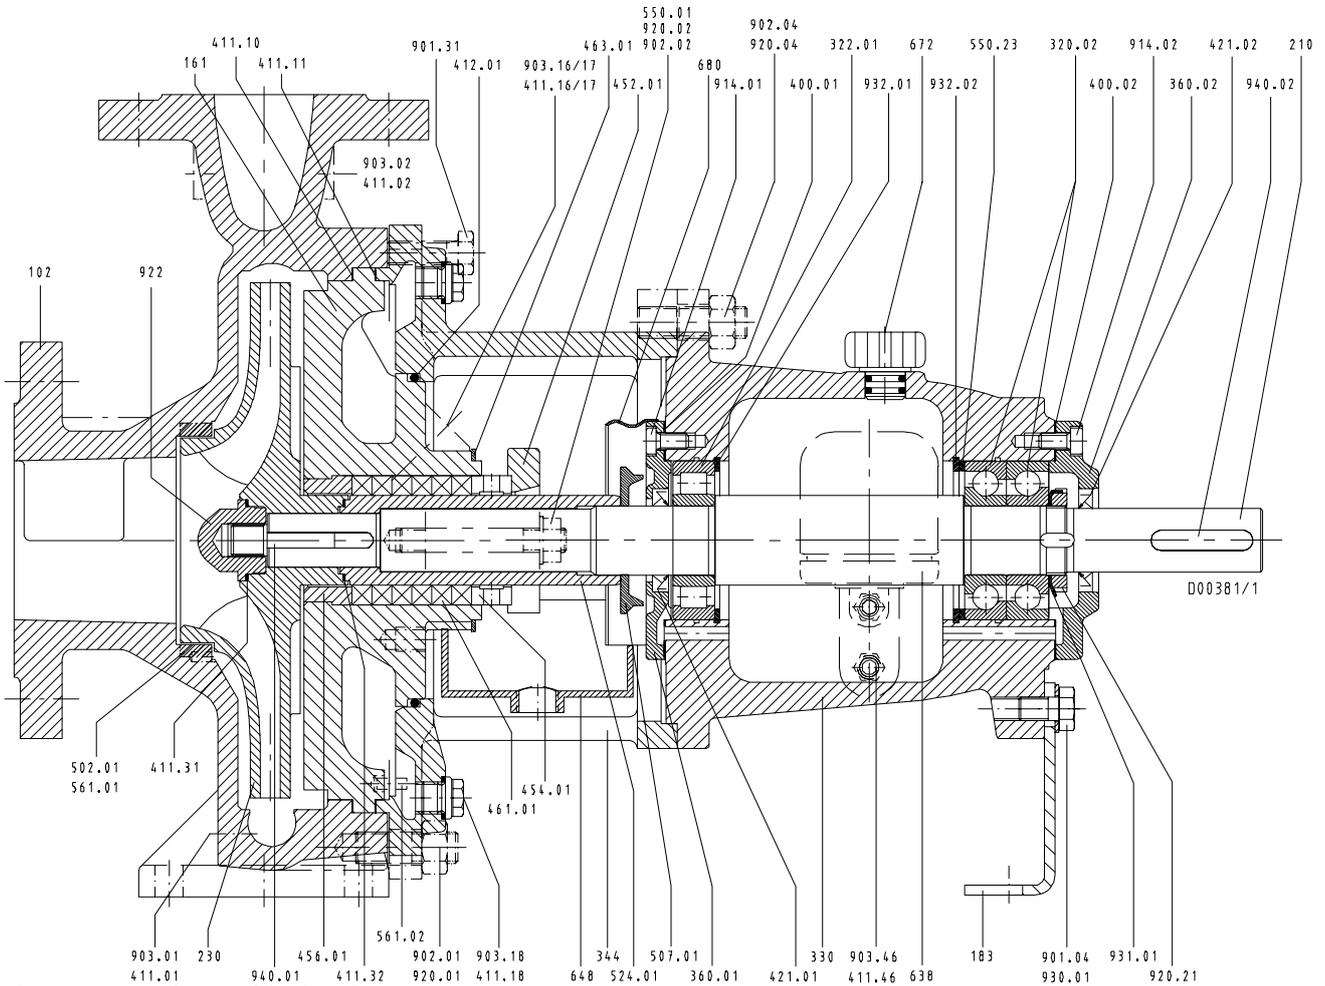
General assembly drawing CPKN -SX 65-315, 80-315, 100-315
